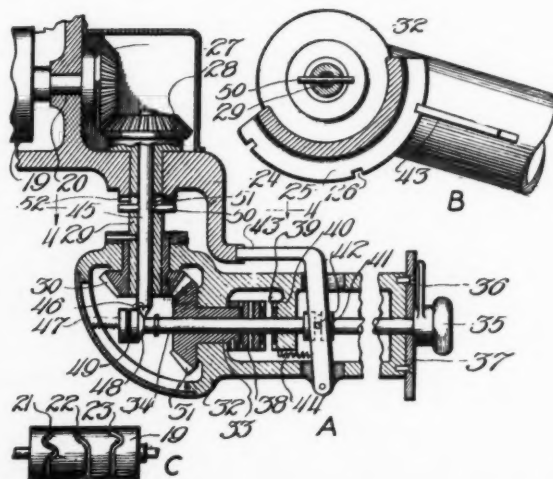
Control mechanism for milling machine to vary the feed from any working position
